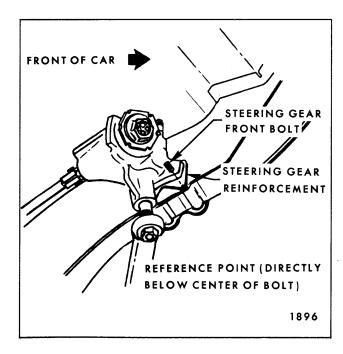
Ref. Point at Steering Gear Reinforcement
